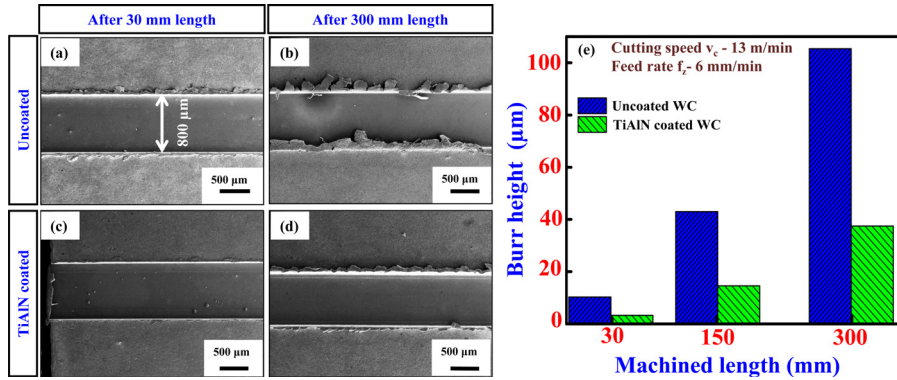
Analysis of burr formation in: (a)-(b) uncoated and (c)-(d) TiAlN coated micro-end mills after slotting 30 and 300 mm machined lengths, (e) variation of burr height with machining length.
